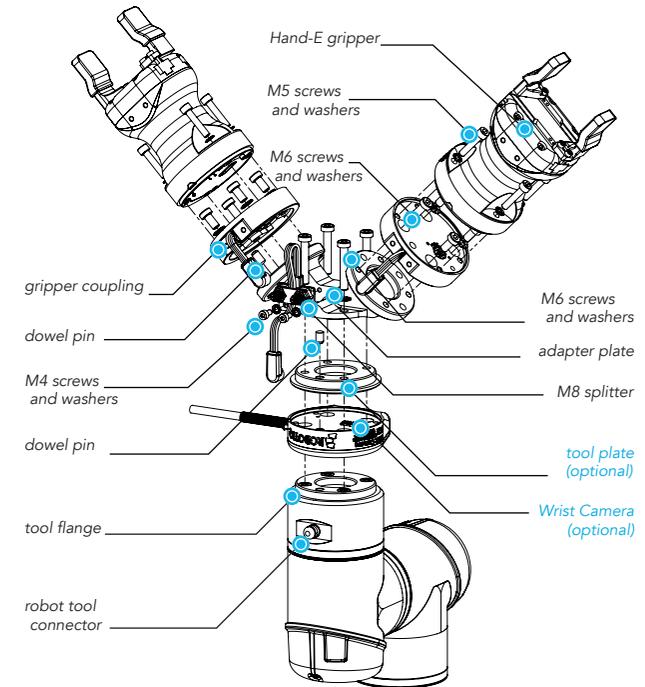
Exploded view of the CNC Machine Tending Kit, Wrist Camera included.
